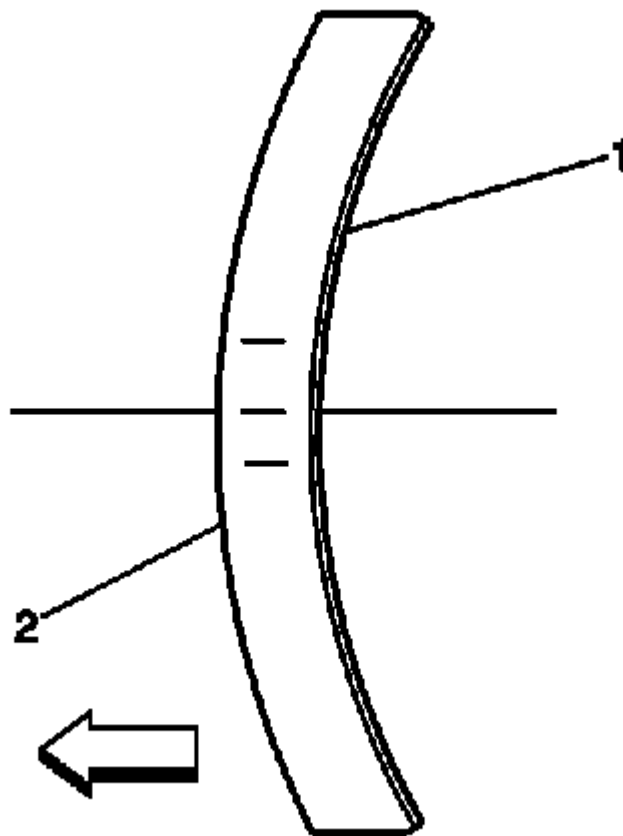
Identifying Crankshaft Balancer Washer Crown
